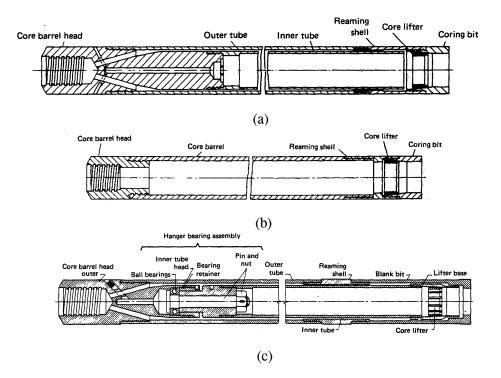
(a) Single Tube Core Barrel; (b) Rigid Type Double Tube Core Barrel; (c) Swivel Type Double Tube Core Barrel, Series "M" with Ball Bearings (Courtesy of Sprague & Henwood, Inc.).
